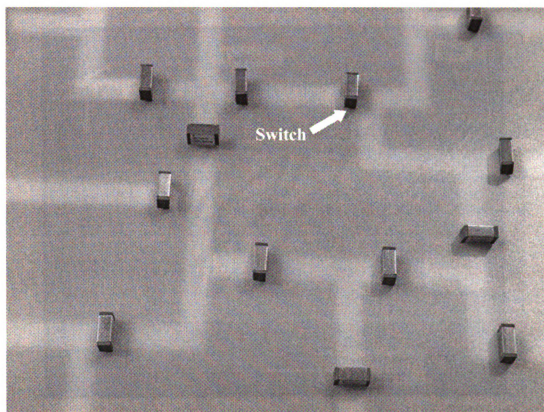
Bottom layer of the fabricated prototype with the switches.
